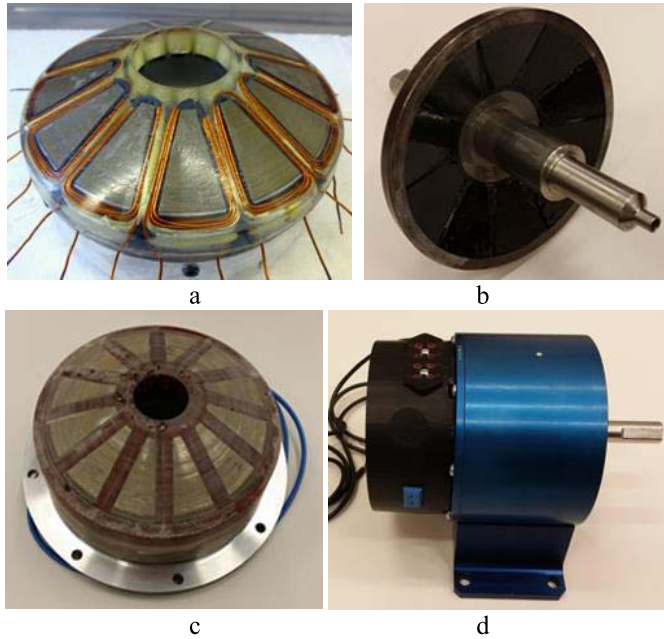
Basic components of the prototype machine. (a) Tapered stator with windings. (b) Ten pole rotor with bonded NdFeB magnets of 6 mm thickness. (c) Stator with back support. (d) Assembled prototype fully enclosed without any cooling.
